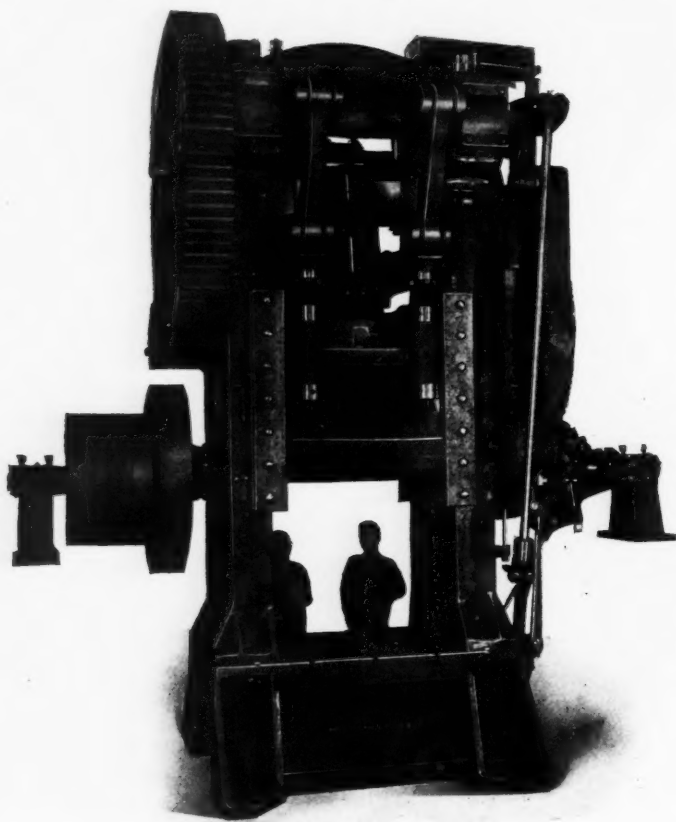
Large Toggle Drawing Press built by E. W. Bliss Co.
